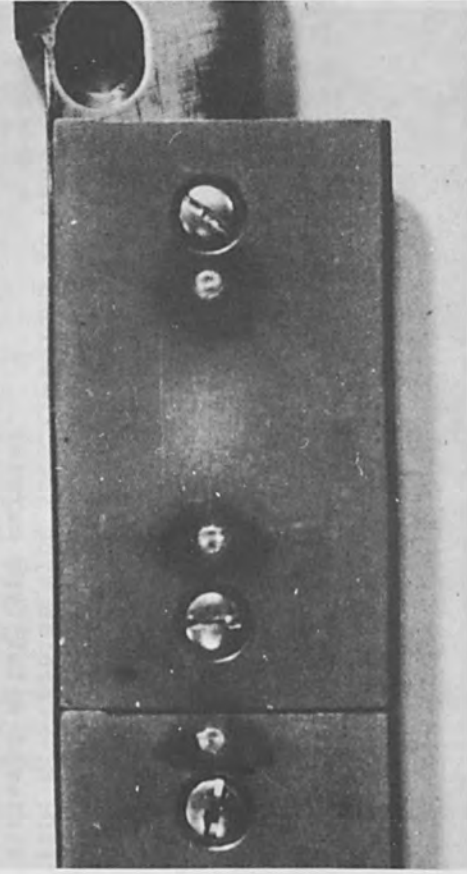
Replacement of screw and dowels for assembling component parts by utilizing EB welding.
